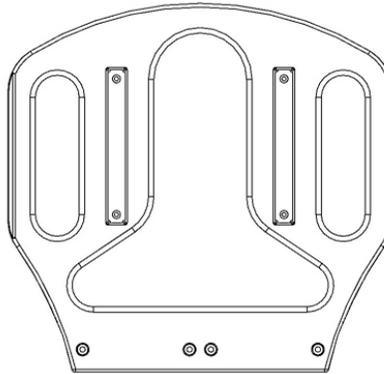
Bottom side view of the bottom half of the IBC housing.
